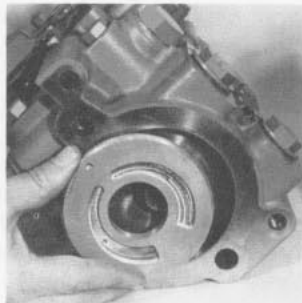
Remove Gerotor Plate (Earlier Unit)
